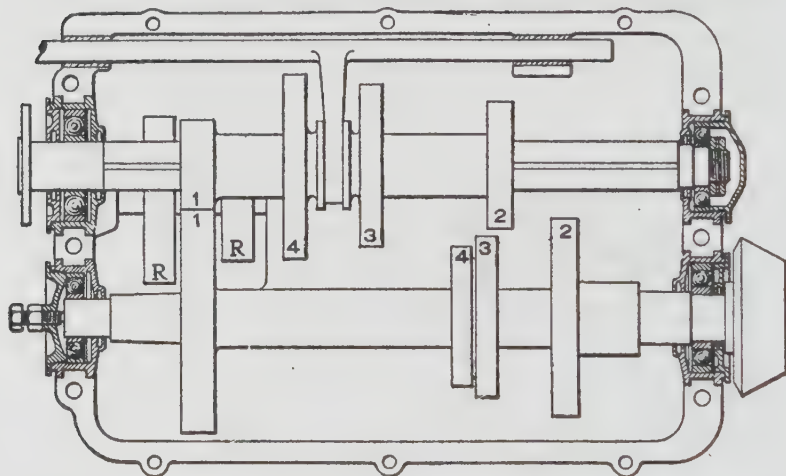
PROGRESSIVE TYPE FOUR SPEED AND REVERSE SLIDING GEAR.
